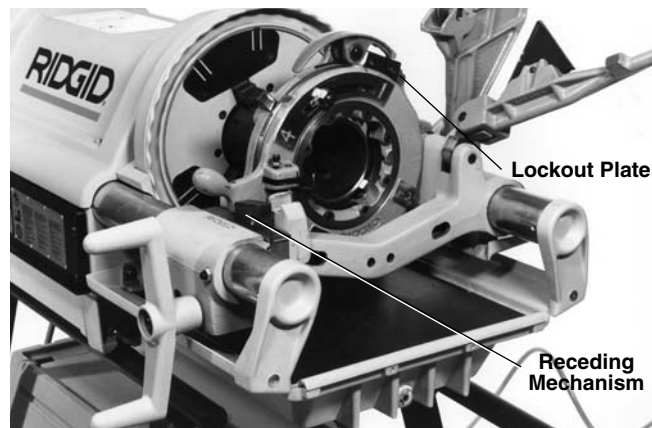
Positioning Lockout Plate for NPT/BSPT Taper Threads
